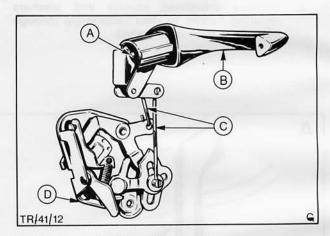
Exterior handle and lock assembly A - Operating plunger C - Control rods D - Lock assembly B - Exterior handle
